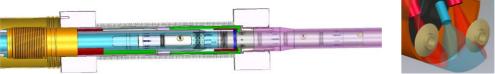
Representation of cutting with rollers in the middle and to end of pressure tube
